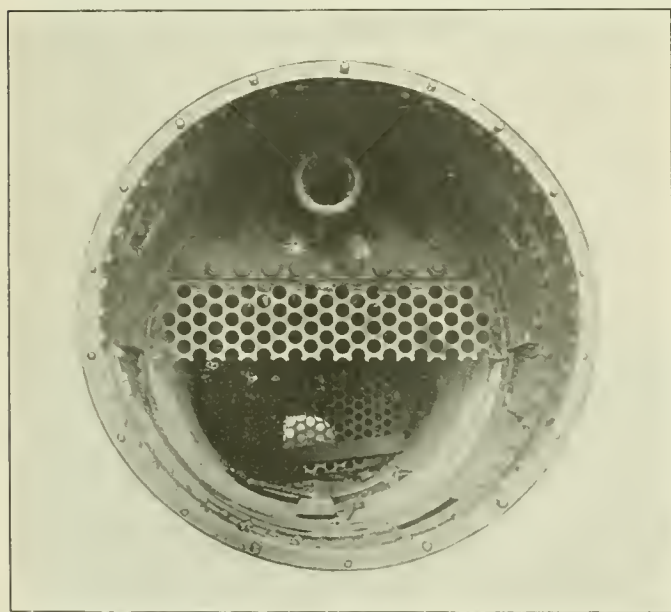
Tube Sheet to Be Repaired by Oxy-Acetylene Welding
